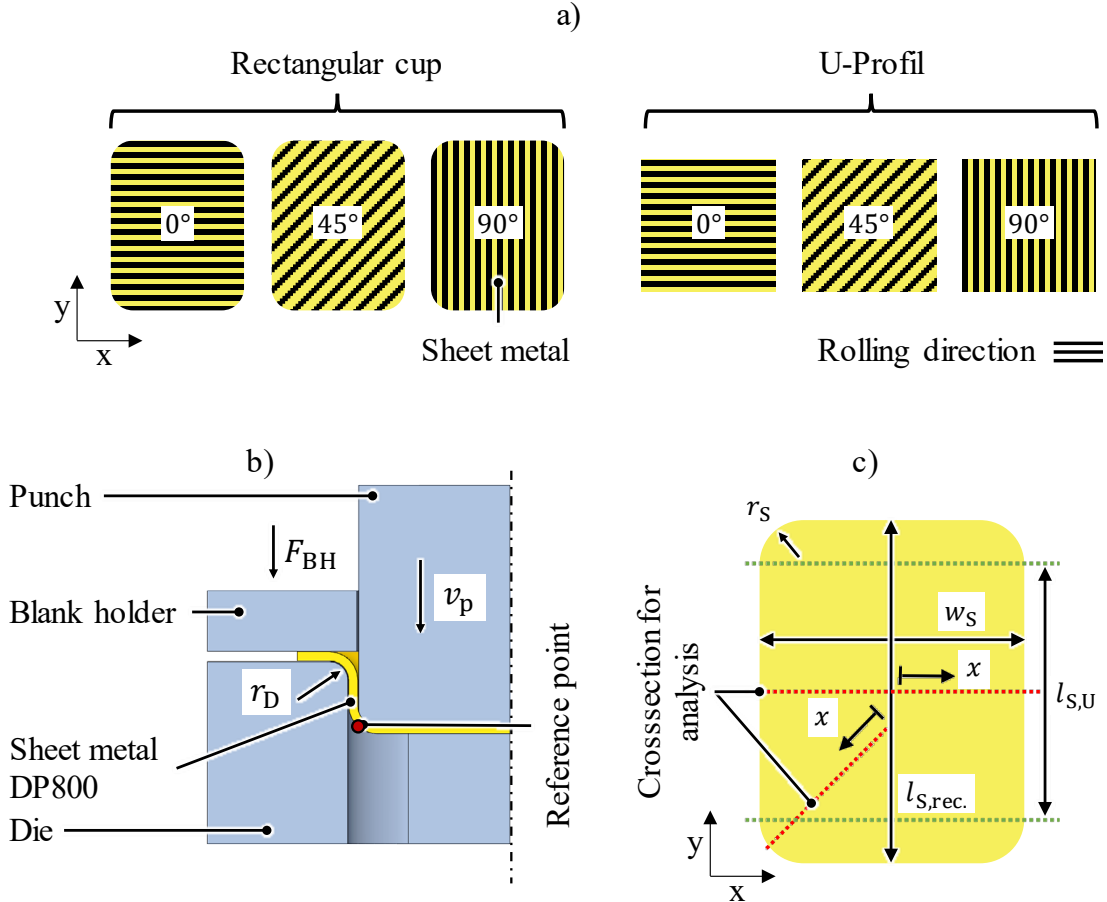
Schematic illustration of a) sheet metal alignment considering rolling direction, b) deep drawing process and c) sheet metal
